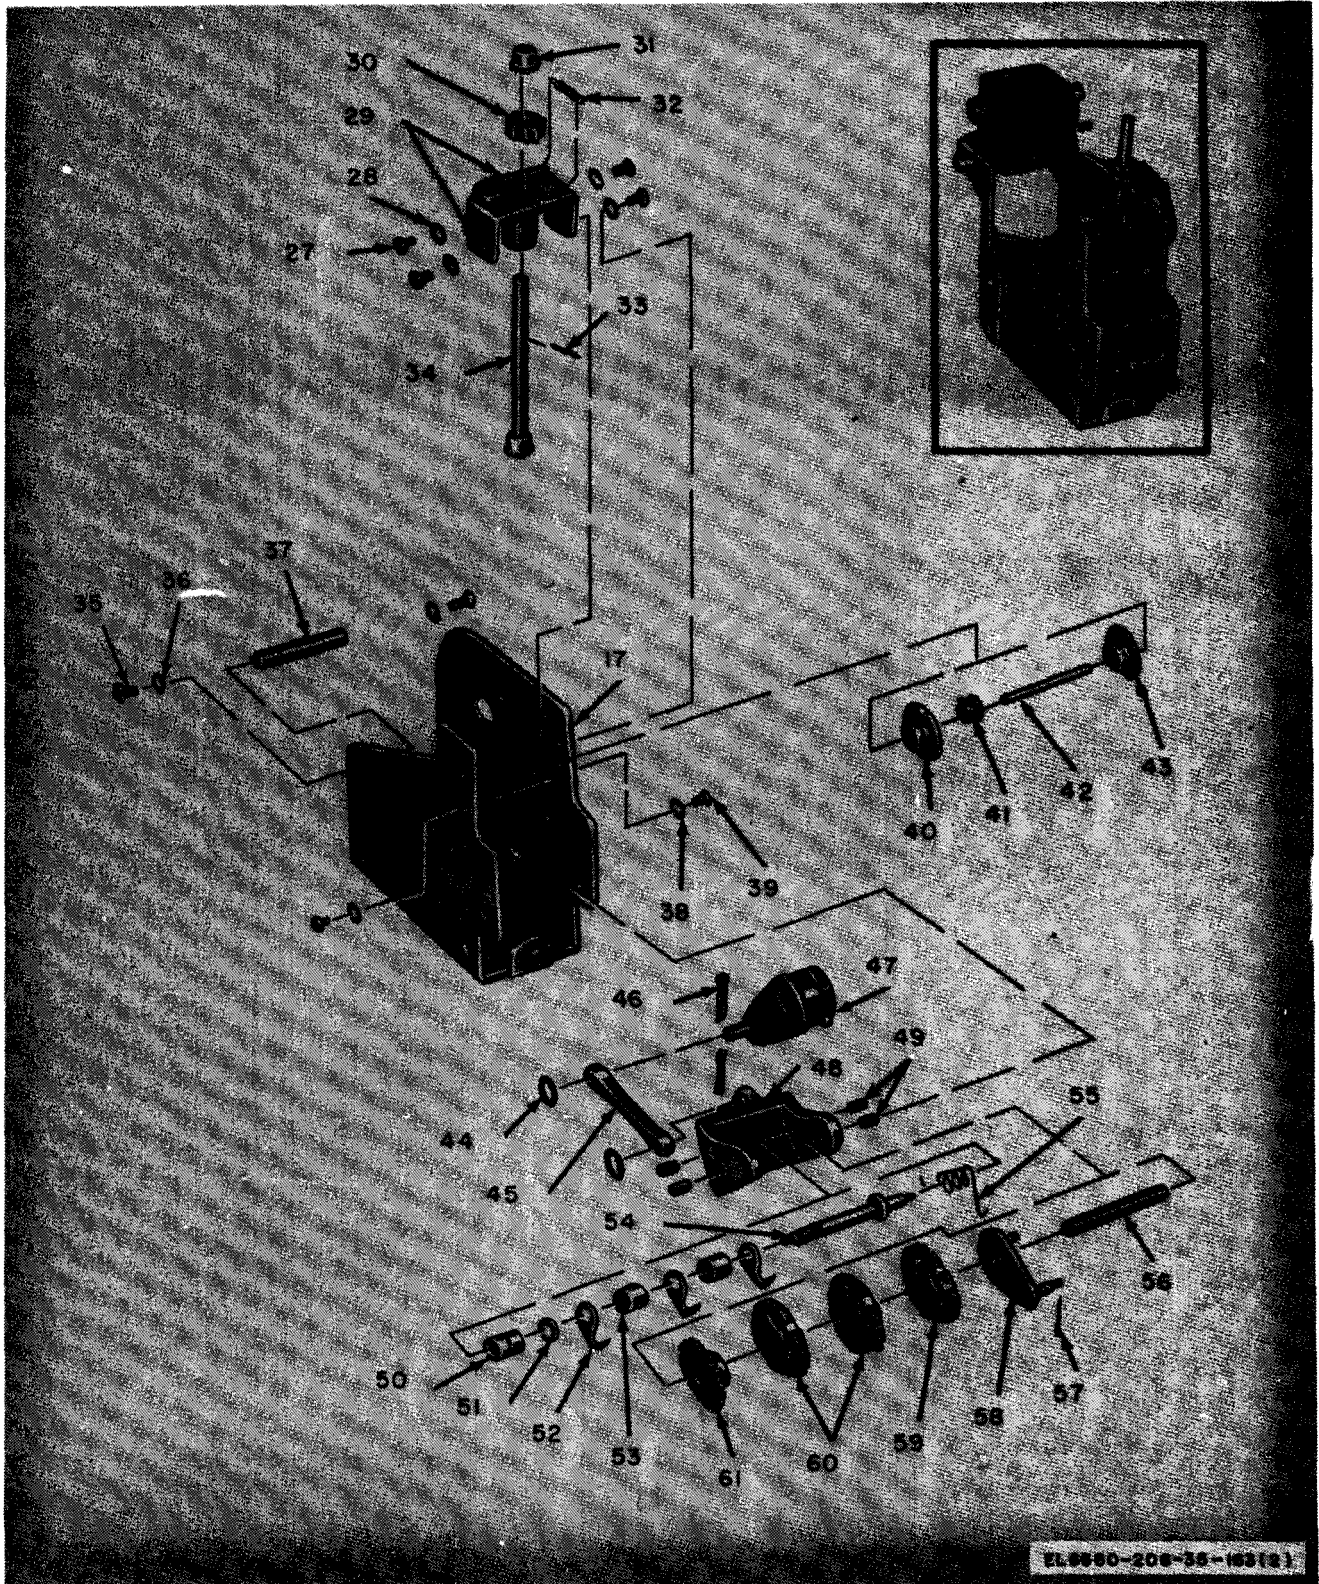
(2). Time-print unit, exploded view (sheet 2 of 3).
